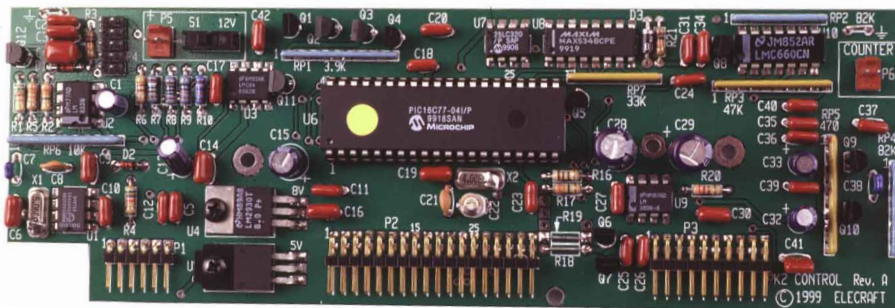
A closer look at the completed control board. The glass epoxy boards have plated through holes and the component identifications and locations are clearly silk-screened on the boards.
